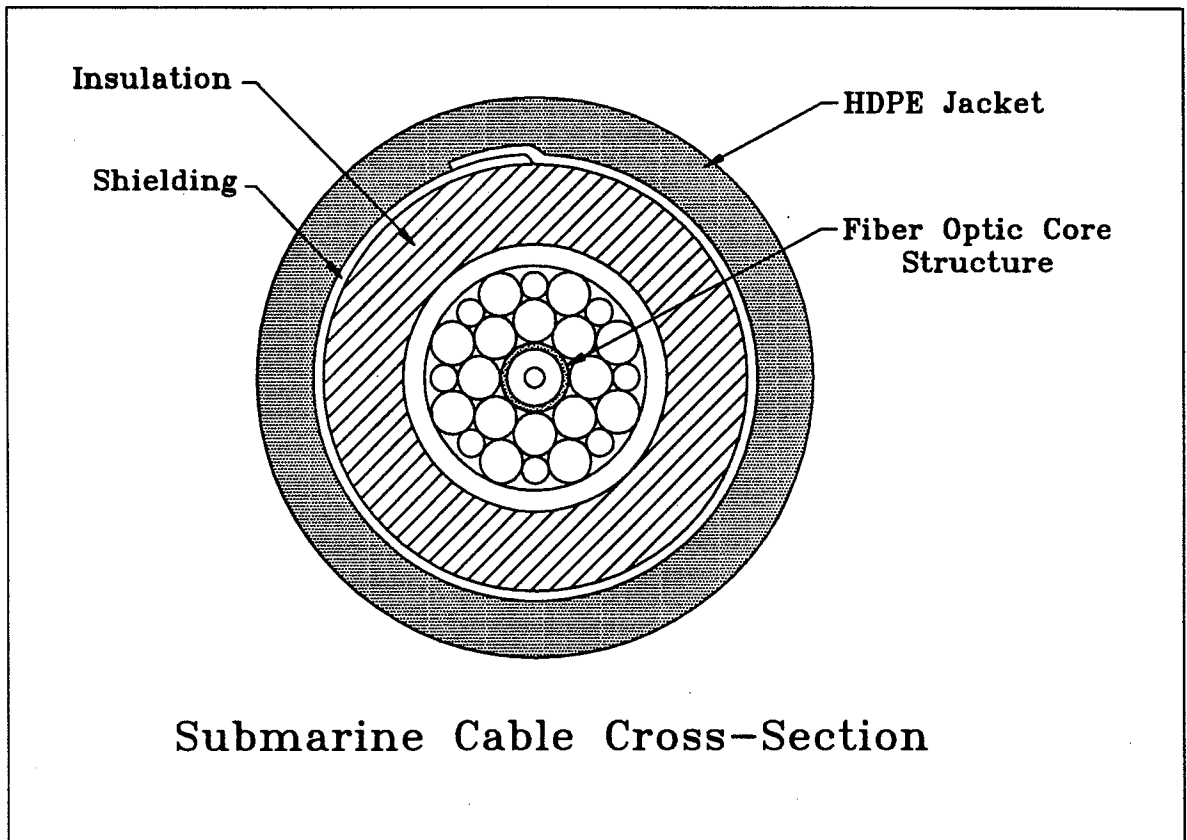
Cable cross-section showing construction details of an electro-optic, submarine cable.
